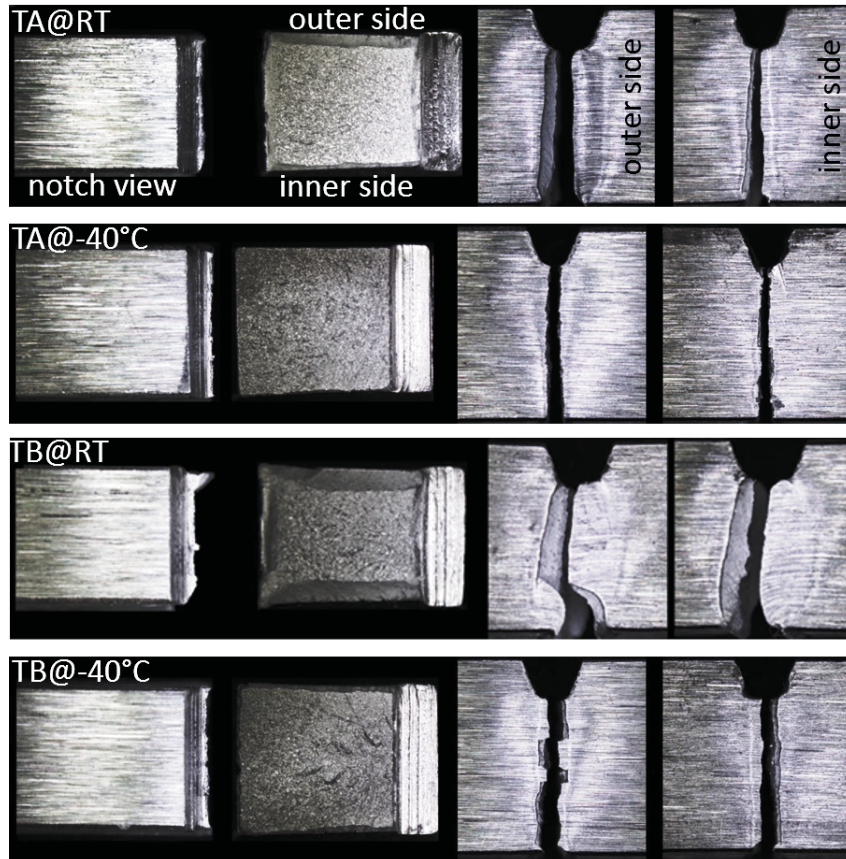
Fracture surfaces after Charpy V - notch tests of TA and TB macro samples at RT and -40 °C.
